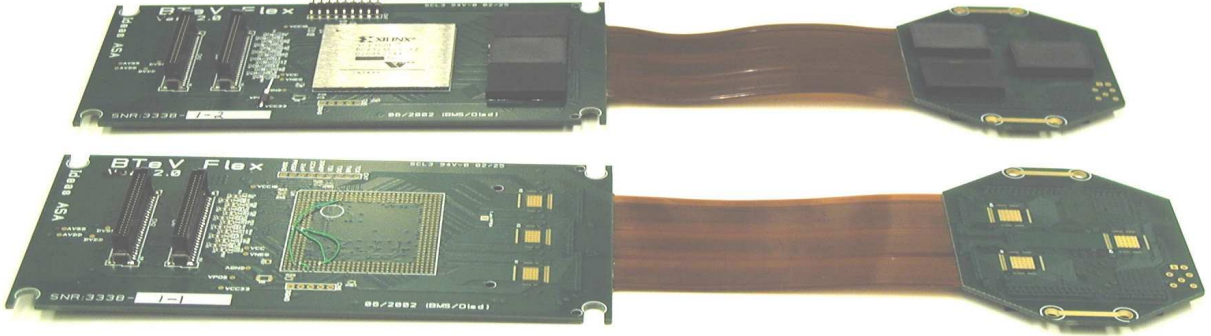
Photograph of the new flex hybrid board which will be used to read out an HPD.
